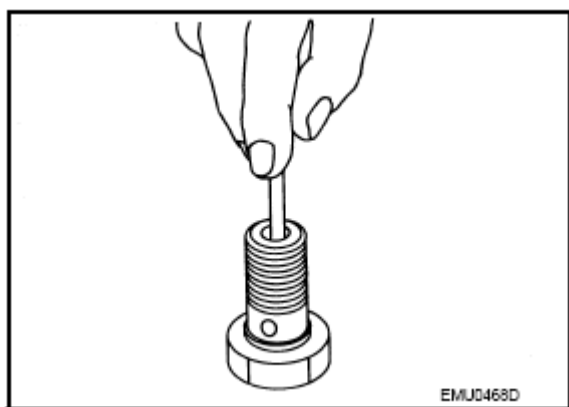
Checking Oil Jet Relief Valve Using Plastic Stick
